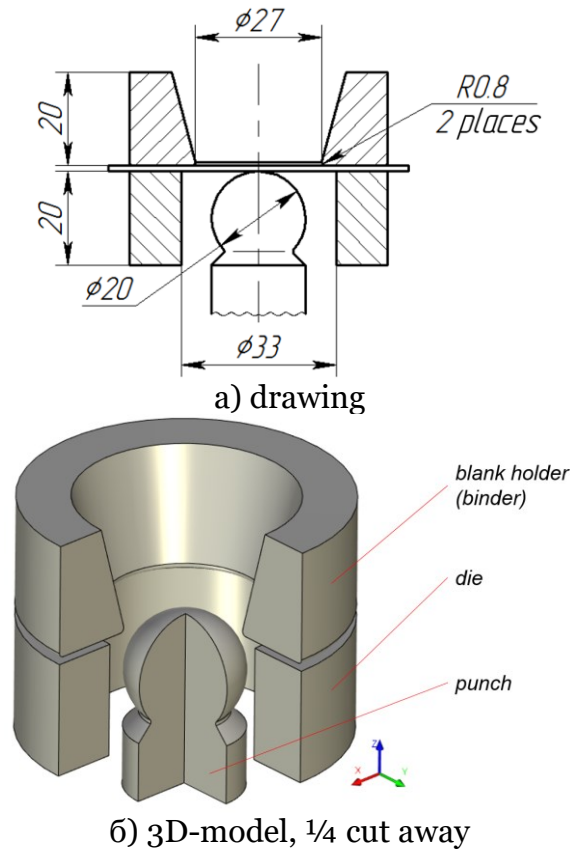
Drawing of the toll with blank (a) and its 3D-model without blank (b)
